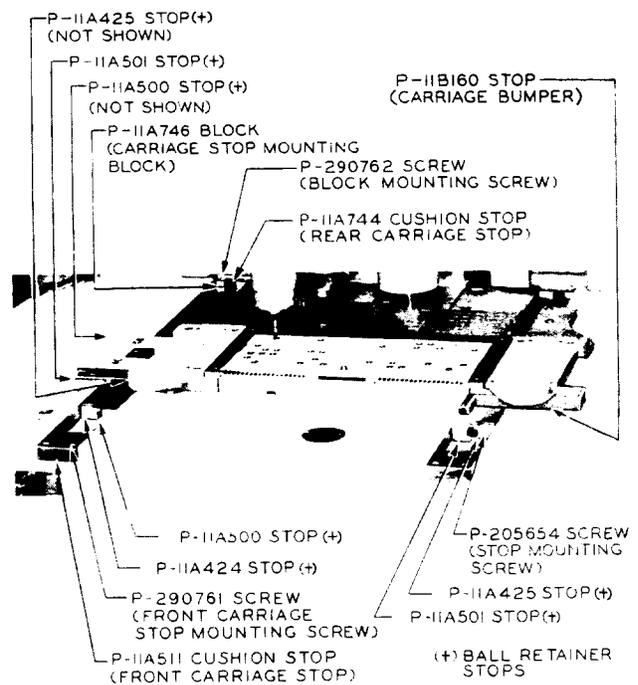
Carriage and Ball Retainer Stops and Carriage Bumper
